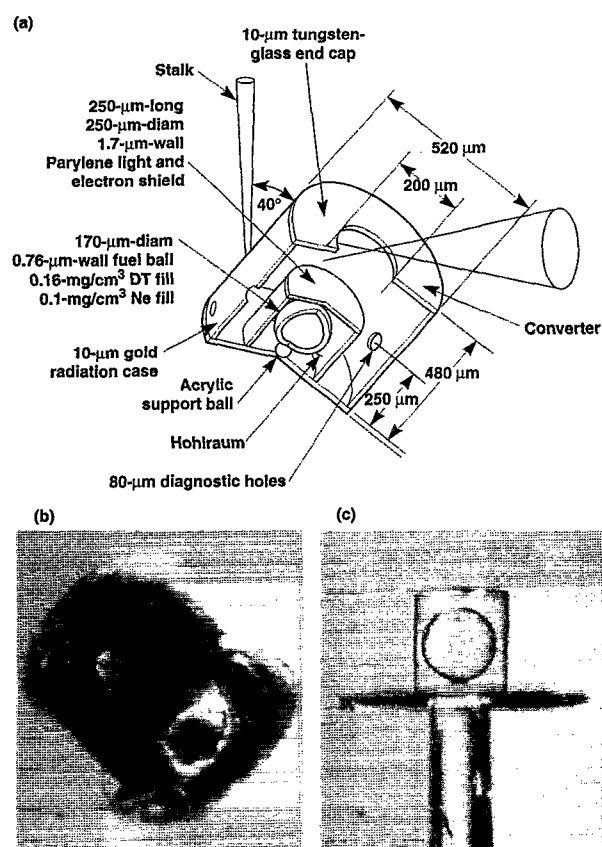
Improved version of Forerunner target: (a) engineering drawing, (b) assembled target, and (c) fuel capsule and Parylene cover mounted on end cap prior to assembly.
